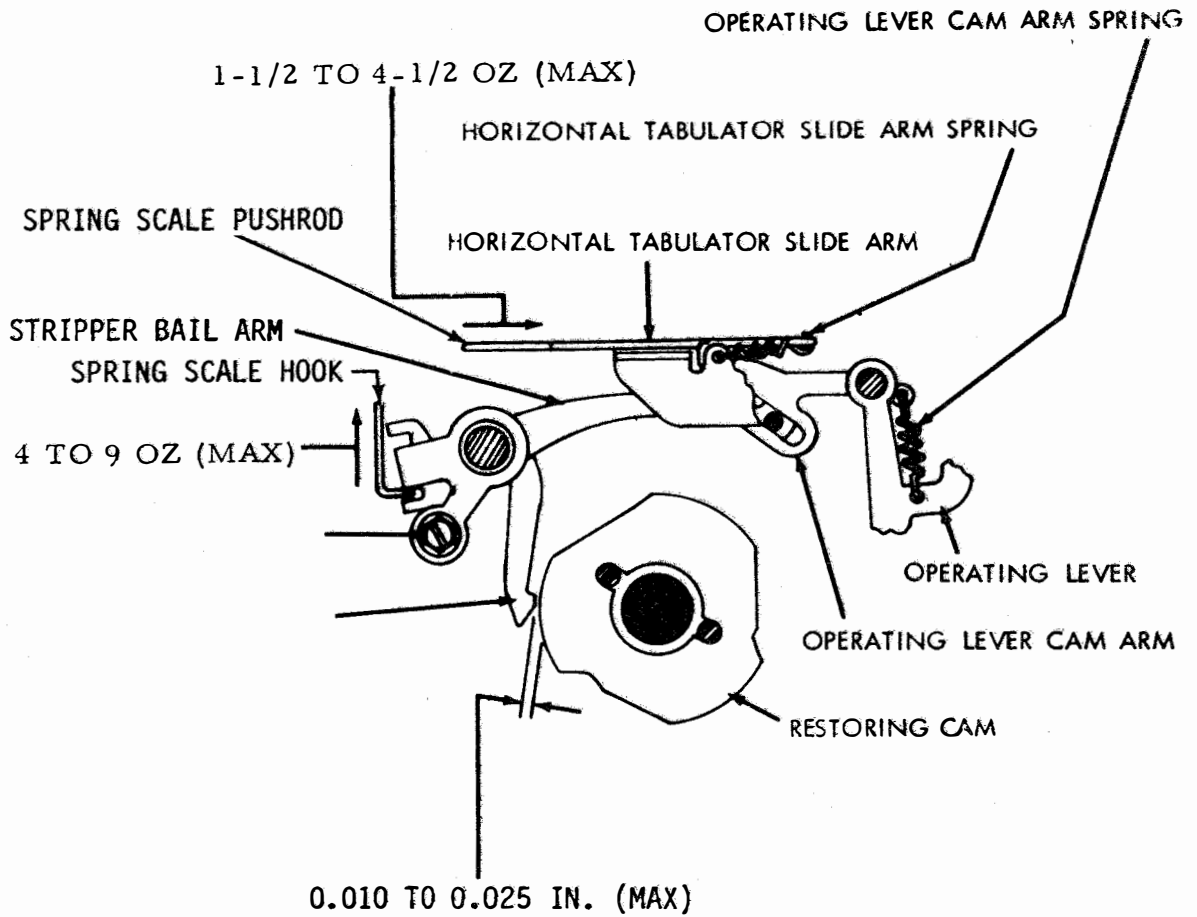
Cam Plate Stripper Bail, Horizontal Tabulator Slide Arm Spring, and Oscillating Lever Cam Arm Spring, Left Side View
